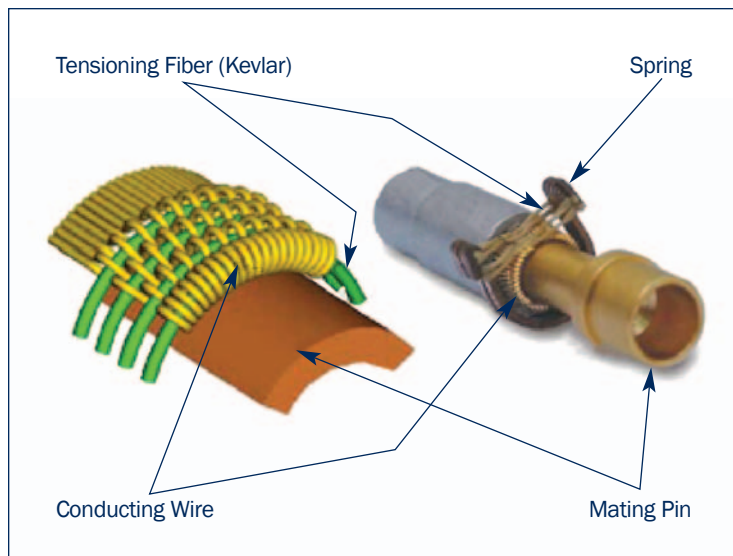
Methode Electronics (formerly Tribotek) method of utilizing woven gold plated copper wire and Kevlar fiber “fabric” with the Kevlar under spring tension to multiply the number of contacts to a conventional mated pin contact.
